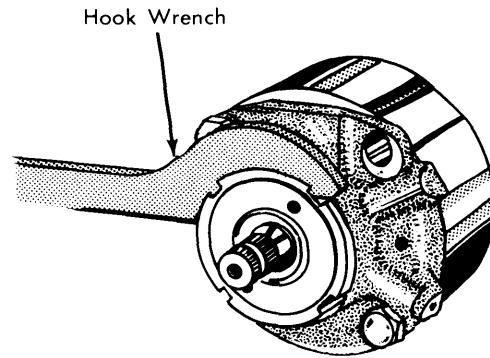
Removing Slotted Nut with Special Hook Wrench
